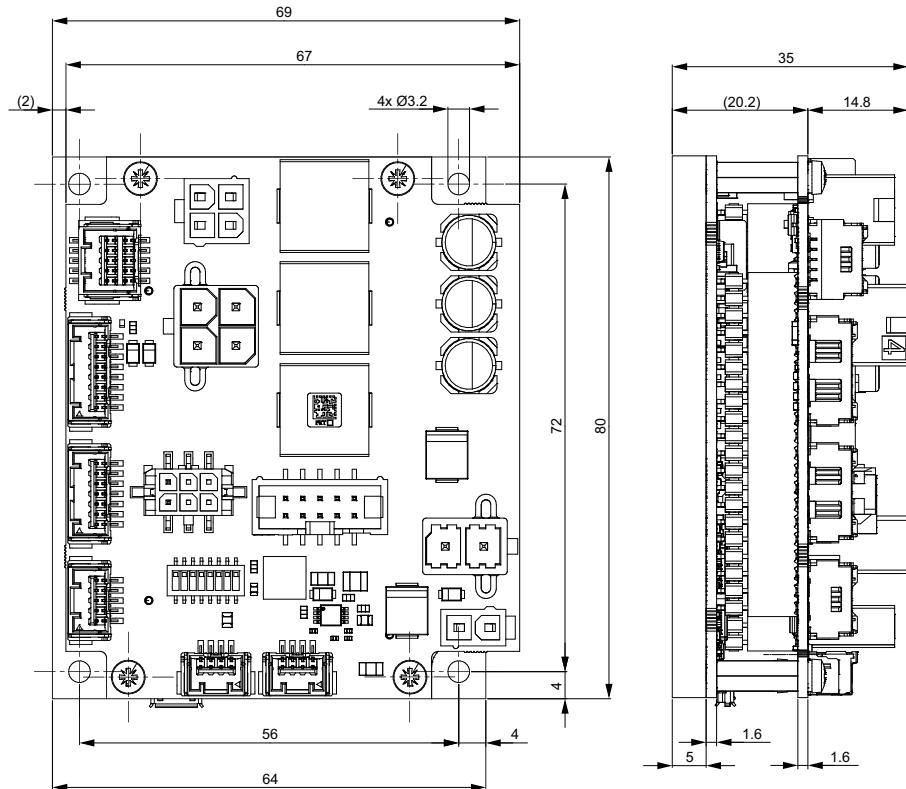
EPOS4 Compact 60/20 CAN – Dimensional drawing [mm]
